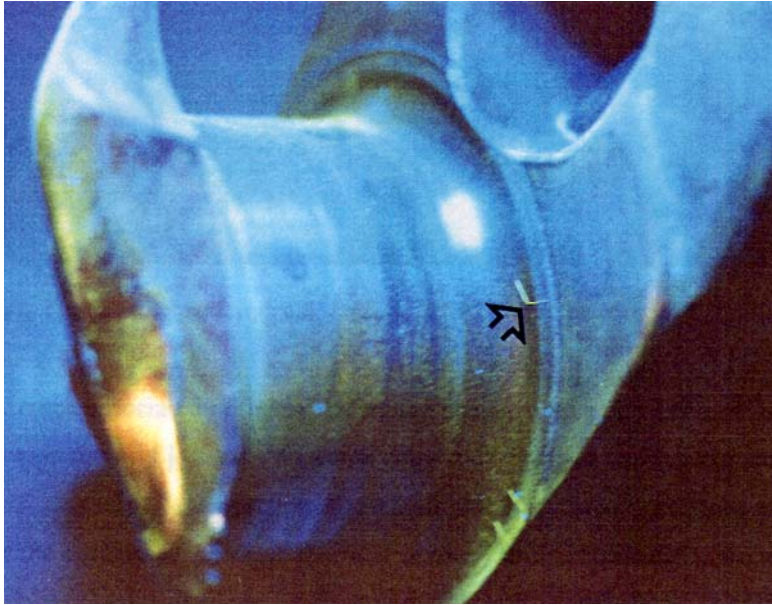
The fatigue fracture, cracking initiated at the forward fillet of the No.1 connecting-rod journal
